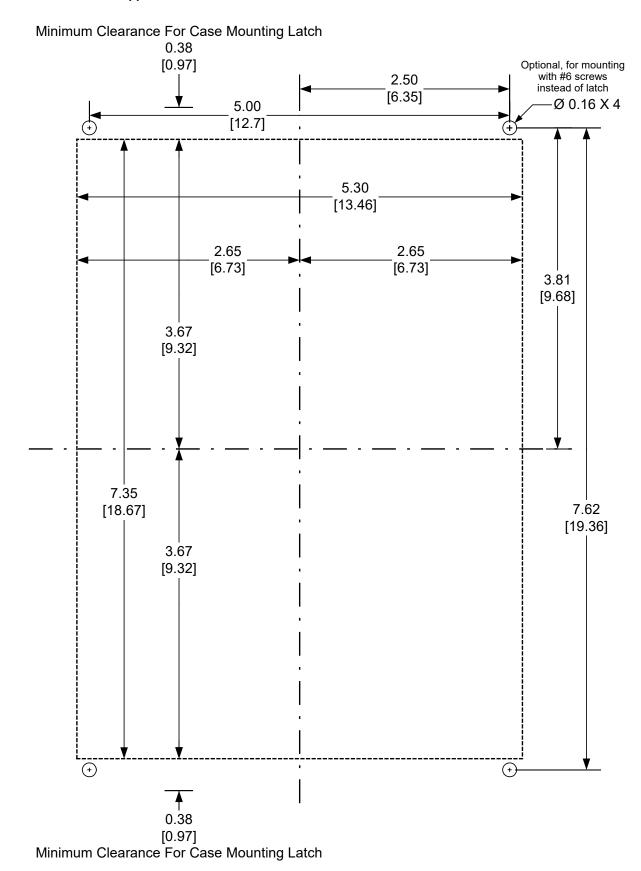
M-7679 Vertical Panel Cutout Dimensions
